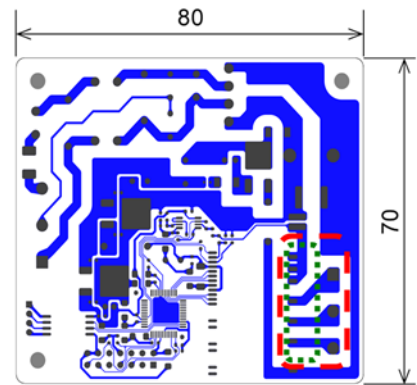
illustrates example wiring patterns on boards. A one-side single-layer board was used to form a board pattern for each of the conventional type and this product. The board size can be reduced by 30%.
